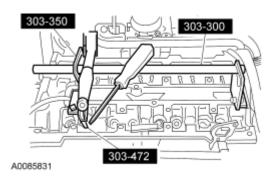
Identifying Special Tools (303-300, 303-350, 303-472) Courtesy of FORD MOTOR CO.
